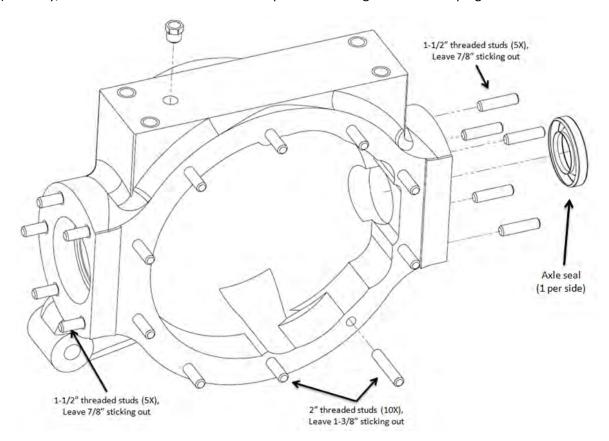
Install the vent, seals, threaded studs and drain plug (not shown) into the rear end housing
